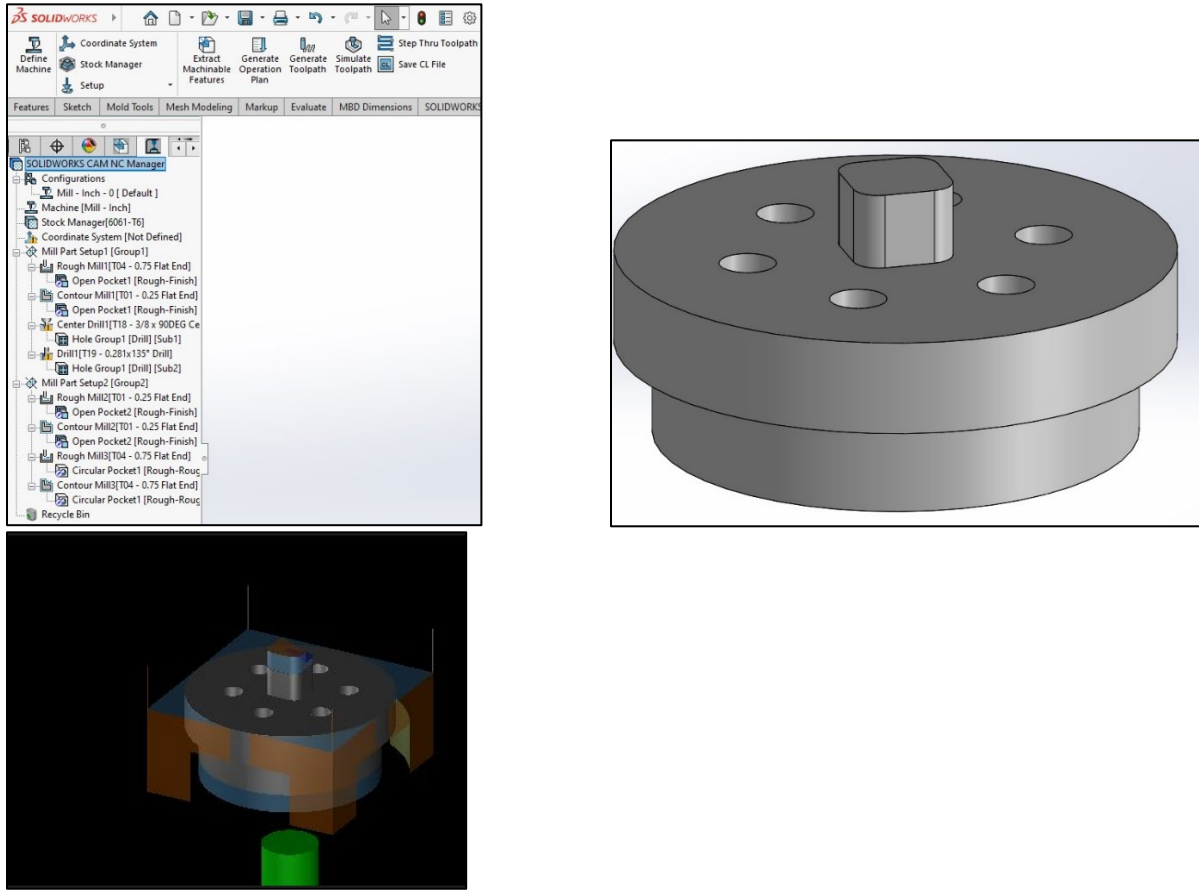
CAM- Machine setup, Part setup and Simulation of tool path
